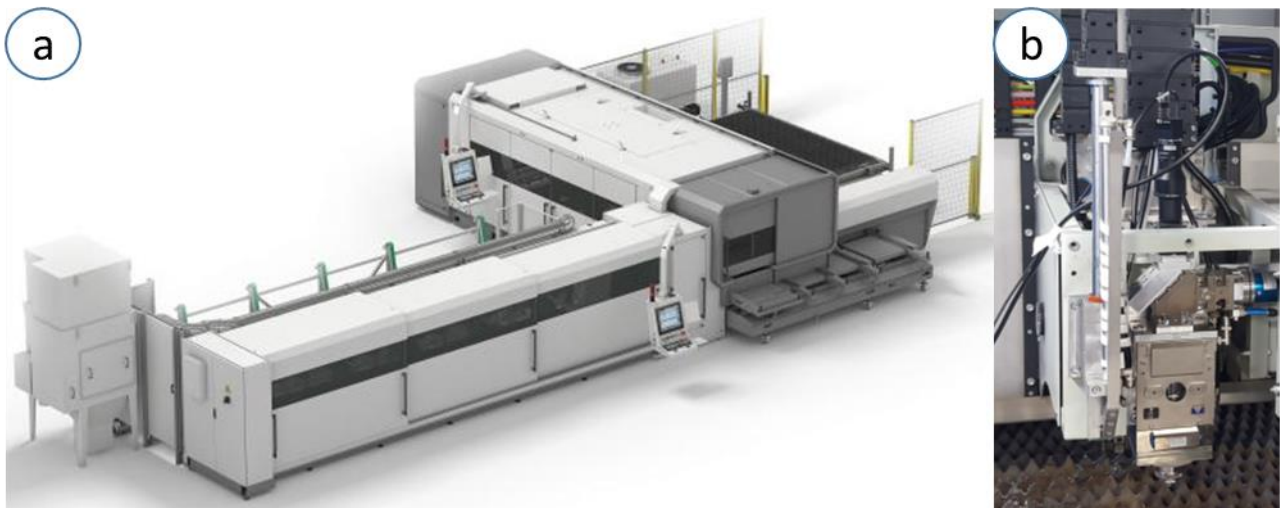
Combined Laser cutting machine (a) – HPSSL, Precitec Laser cutting head (b) (44)
